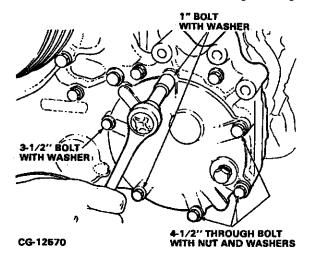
Remove Injection Pump Drive Gear Access Cover Bolts
